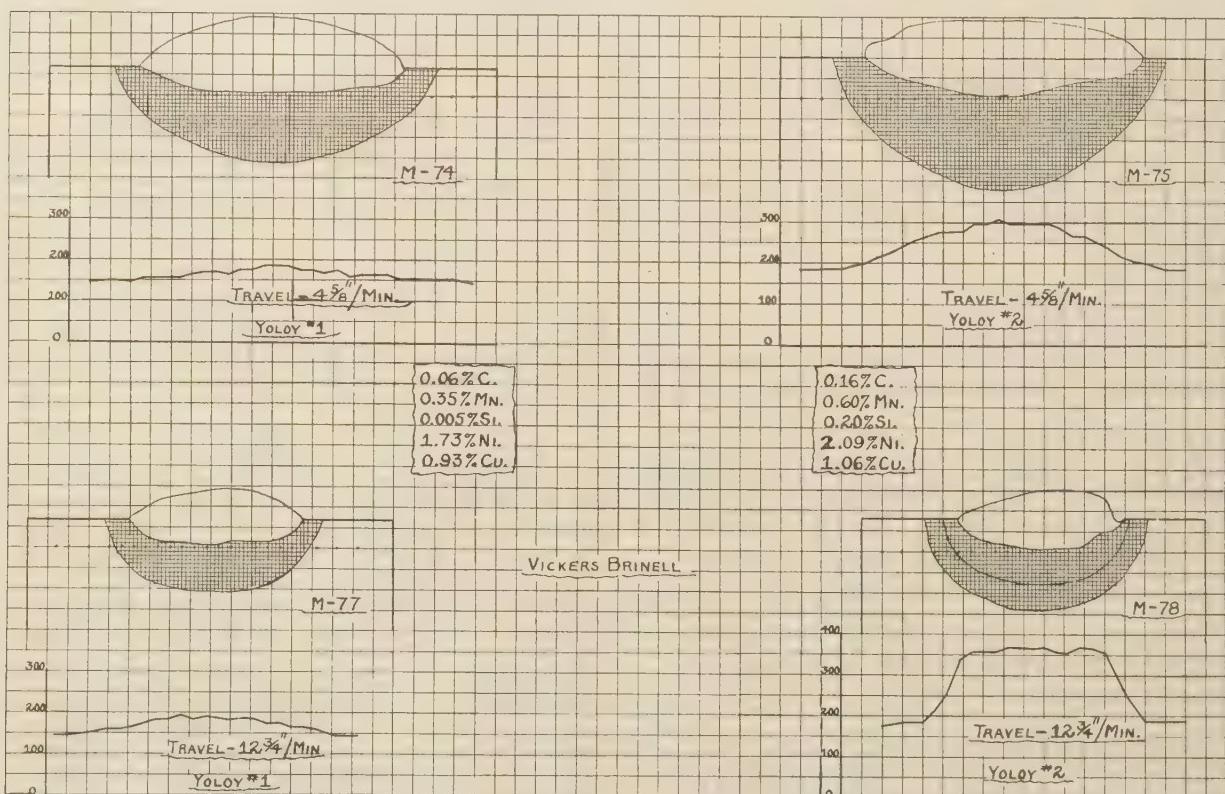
EFFECT OF WELDING HEAT ON 1/2-IN. NI-CU STEEL PLATE
